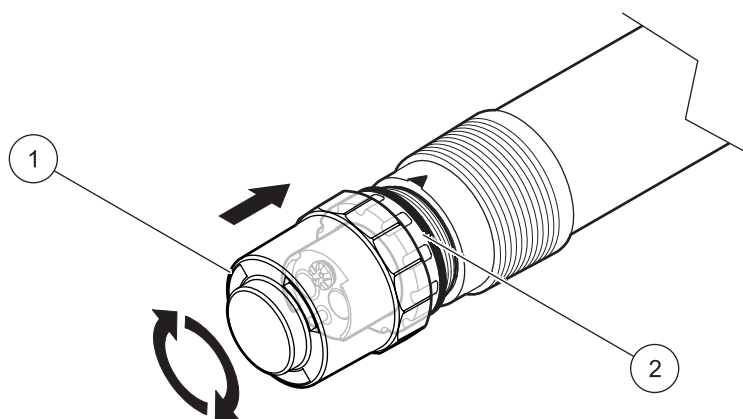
Cap of the storage container as a tool/screwing aid for the locking ring
